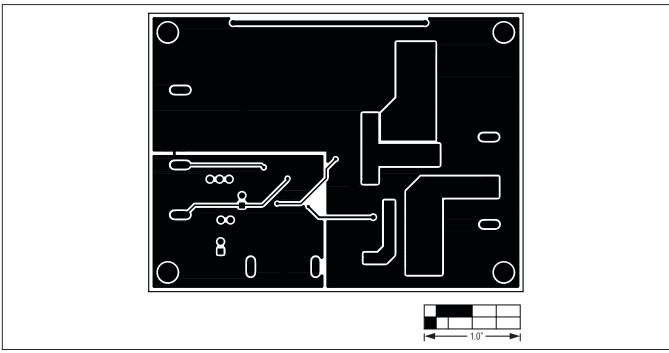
MAX16833 EV Kit PCB Layout—Solder Side
